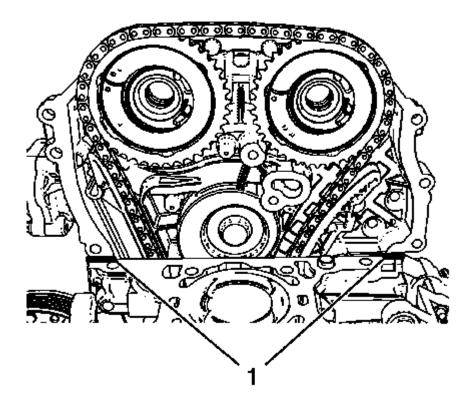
Engine Front Cover Gasket Courtesy of GENERAL MOTORS COMPANY
